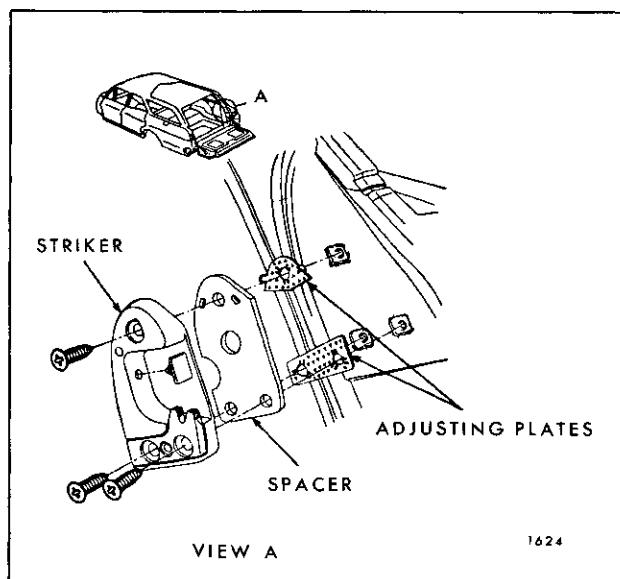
Tail Gate Lock Striker Assembly - "A" and "B" Body Styles
